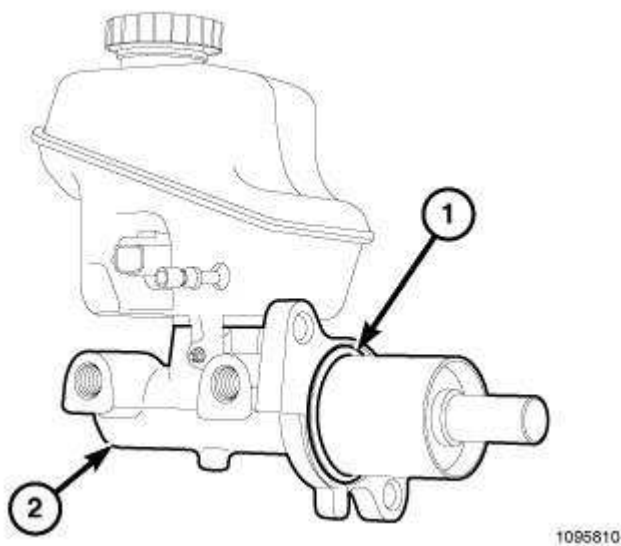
VACUUM SEAL ON REAR OF MASTER CYLINDER
